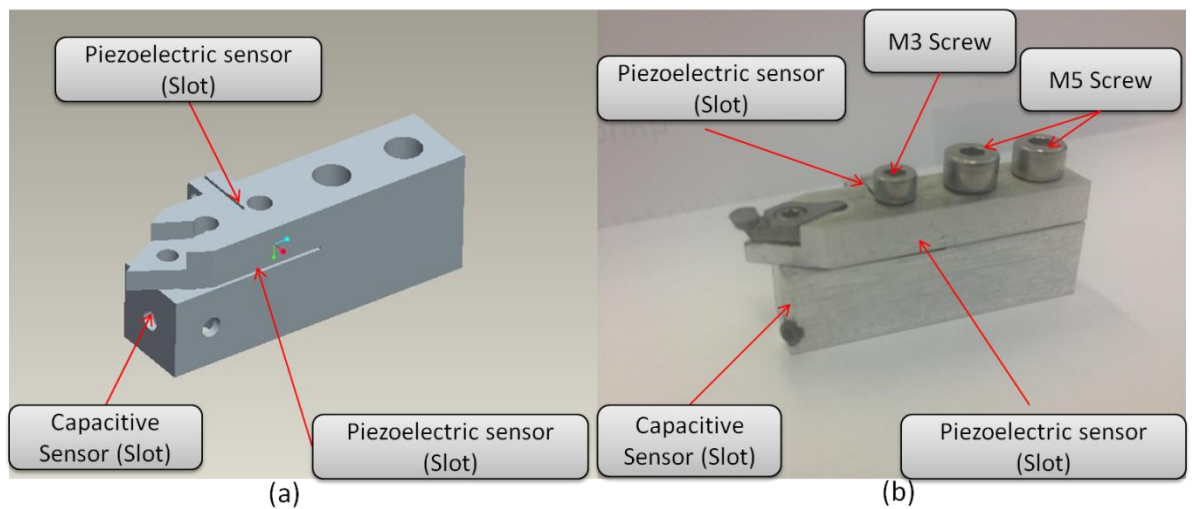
The design configuration of the smart cutting tool 3D model (a) and the design configuration of the smart cutting tool prototype (b)
